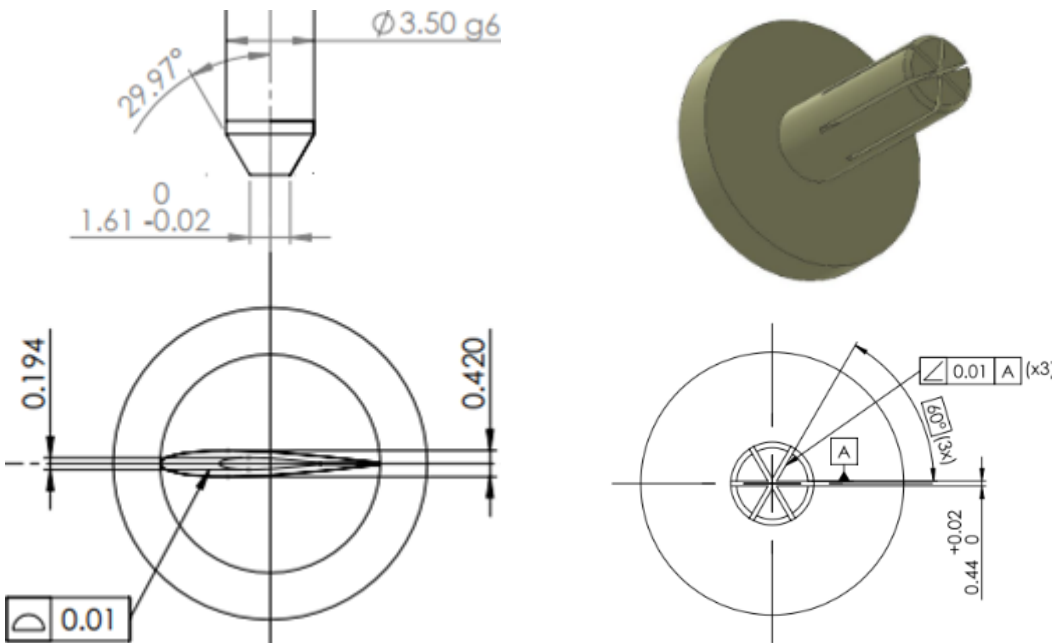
Dimensional and Geometrical Tolerances of the part used to calibrate the Initial position of the system
